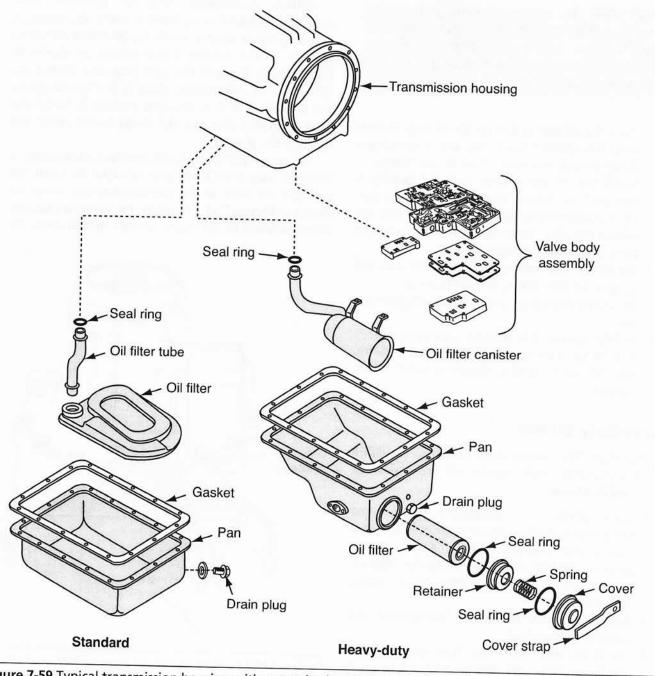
Typical transmission housing with a standard and a heavy-duty oil filter and oil pan configuration.
